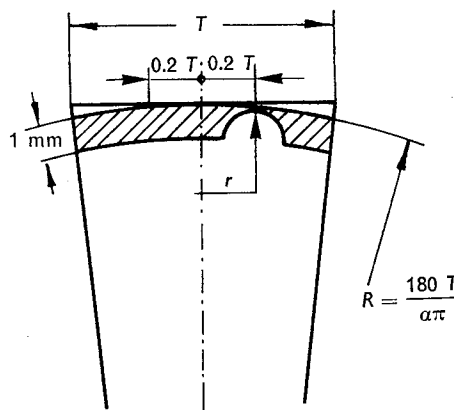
Tolerance on shape of the convex thick edge.
